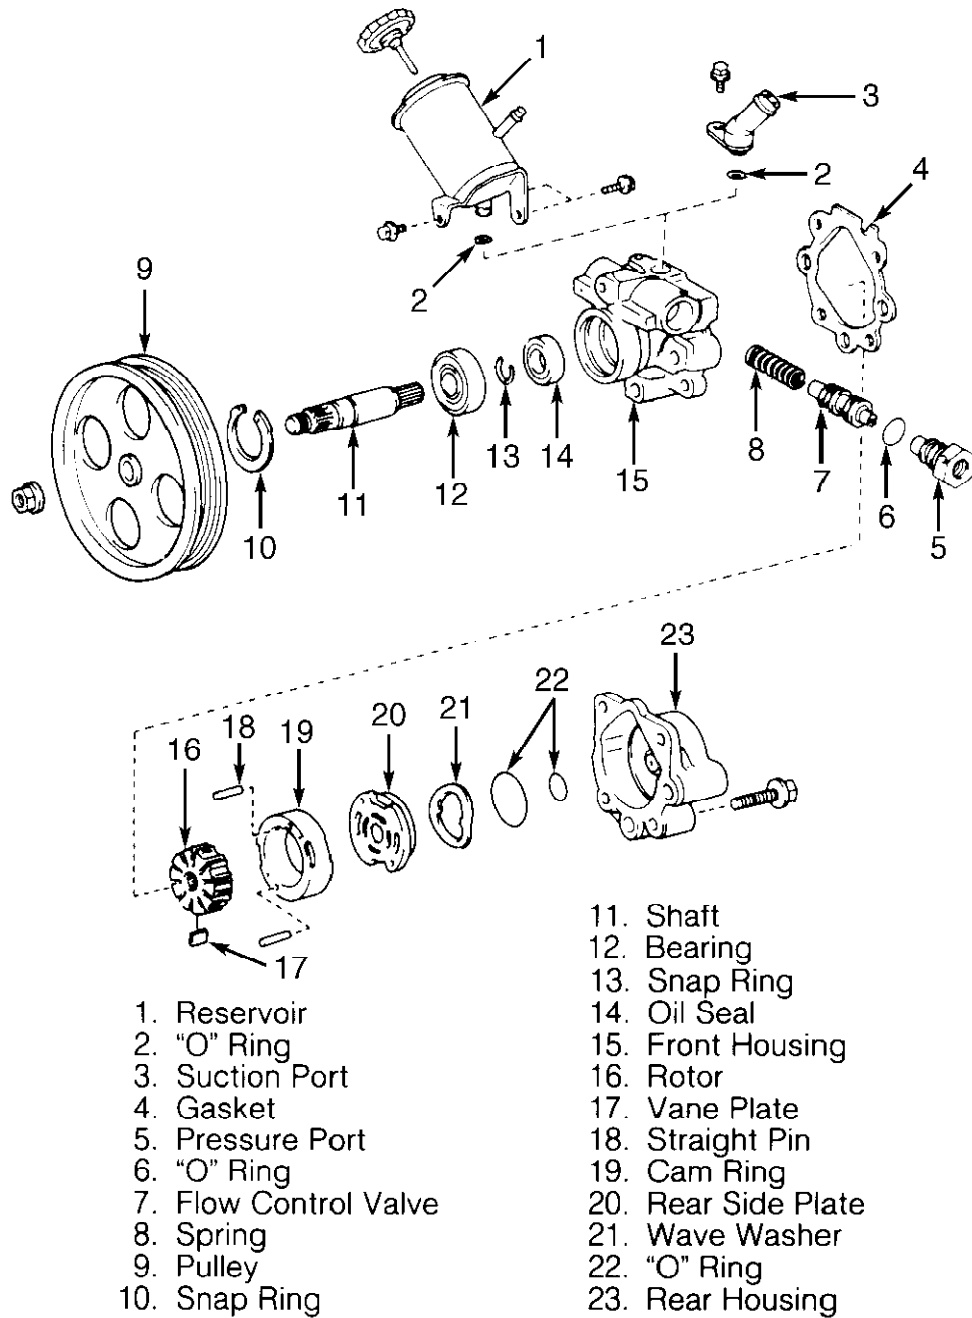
Exploded View Of Power Steering Pump (Previa)
